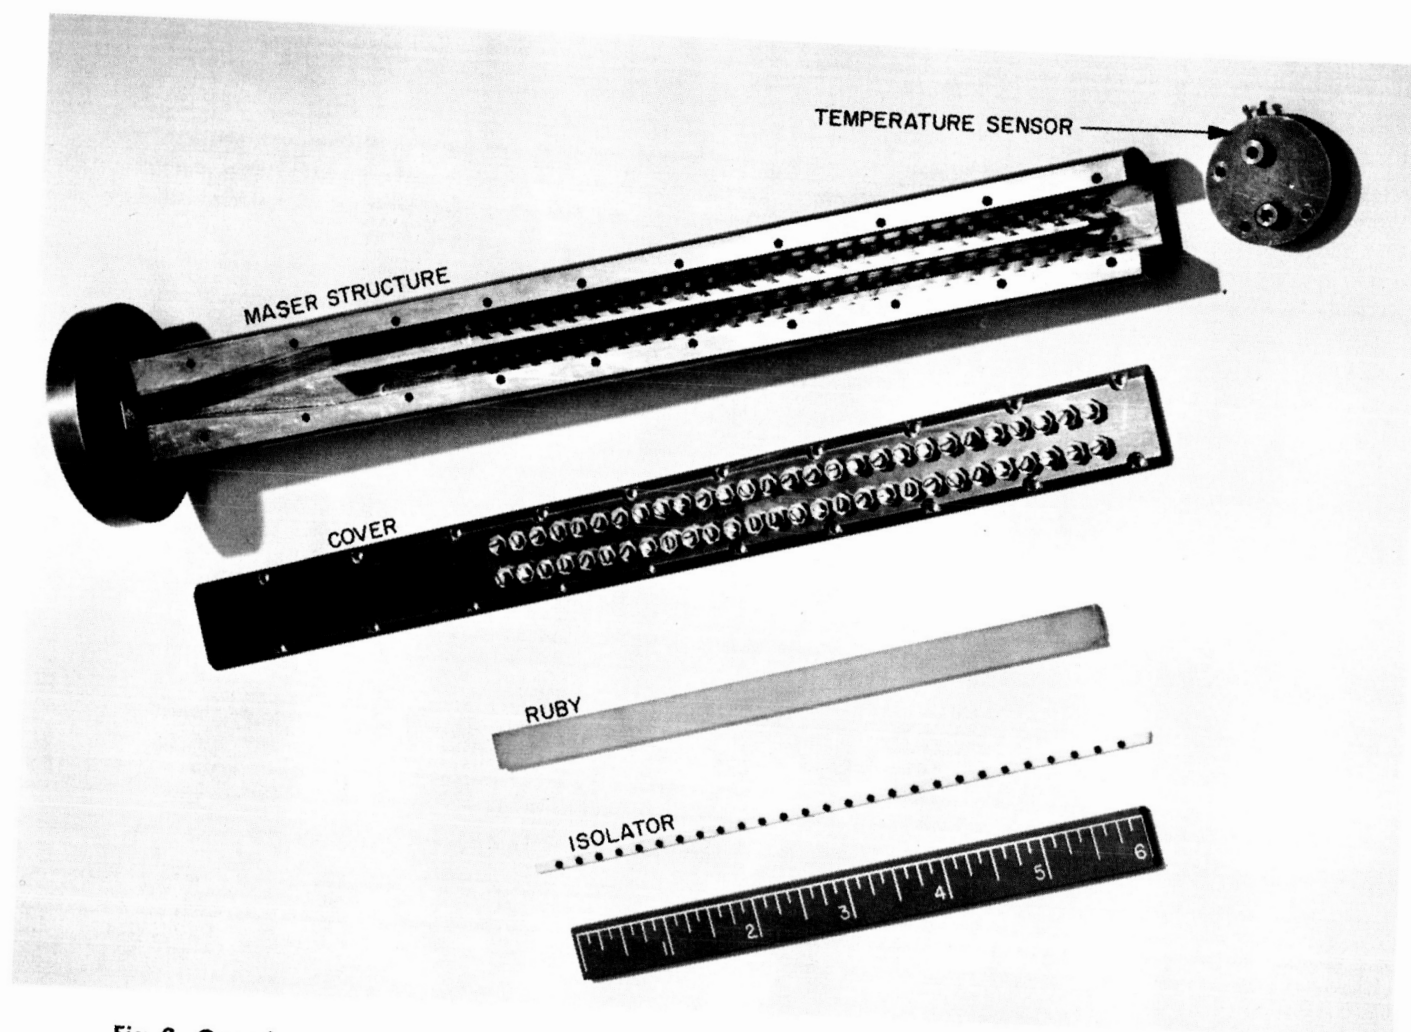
One piece copper maser comb structure fabricated with conventional machining techniques
